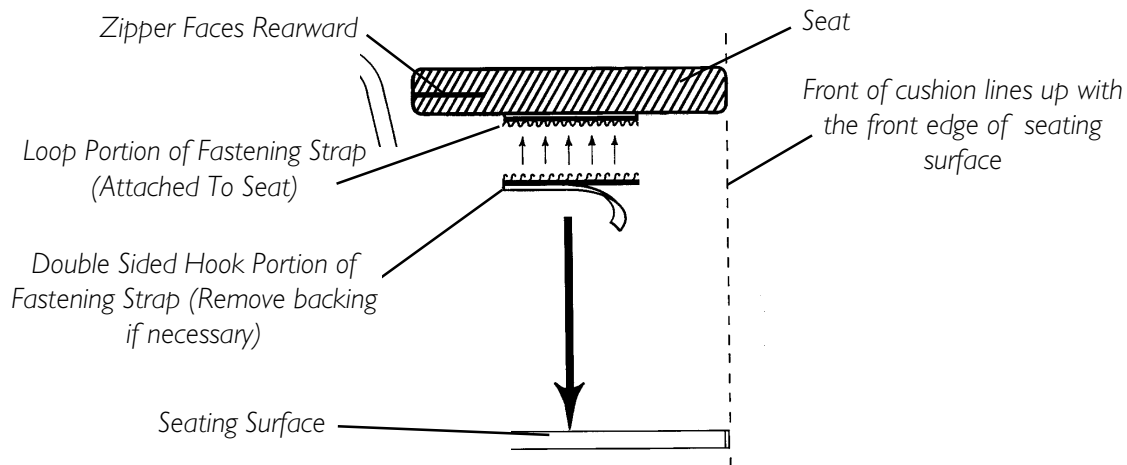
ATTACHING/REMOVING SEAT TO/FROM SEATING SURFACE
